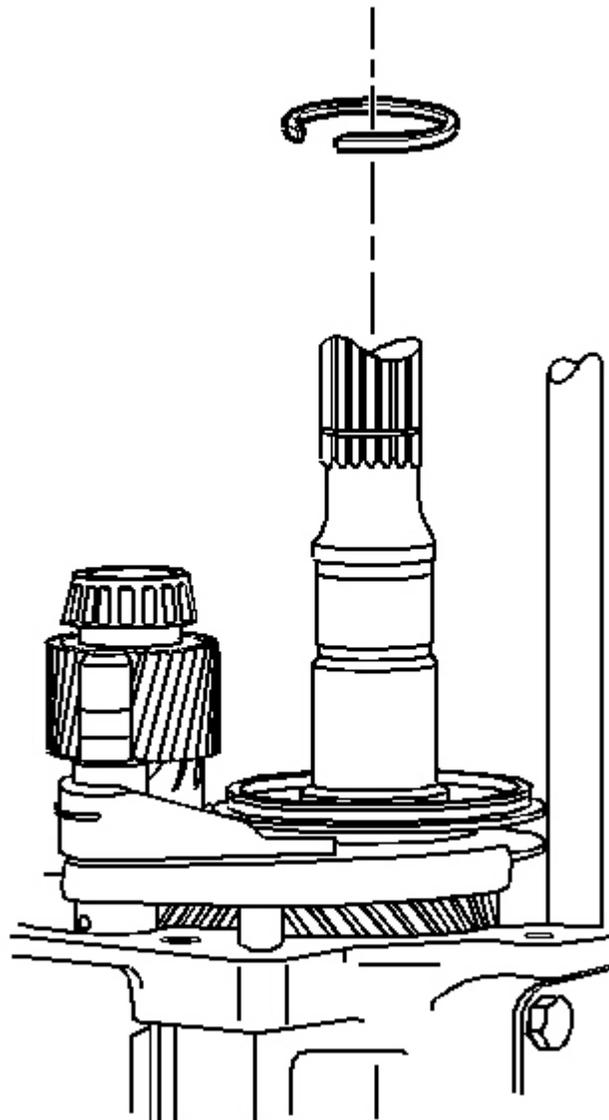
View Of Reverse Synchronizer Retainer Ring
